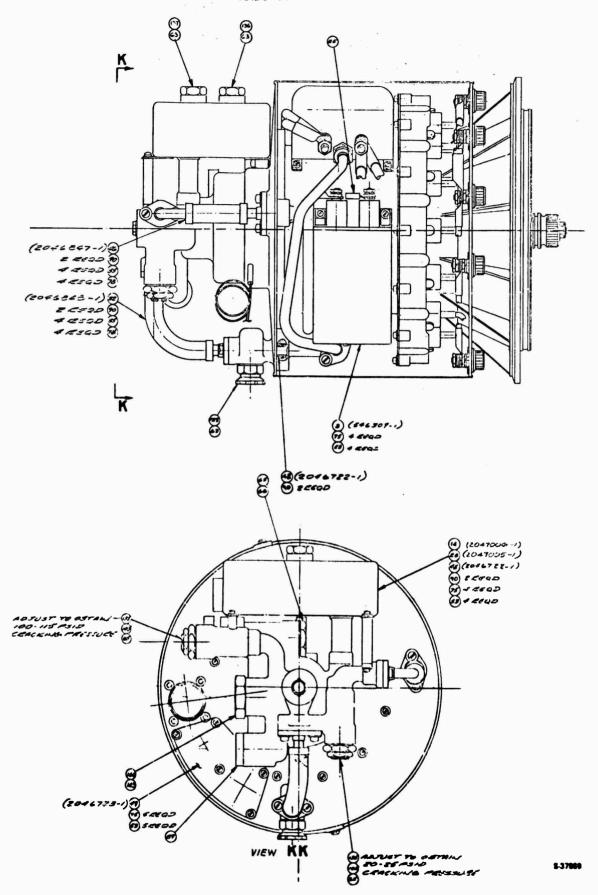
270 VDC Generator Assembly, PN 518989-1 (Sheet 4)
